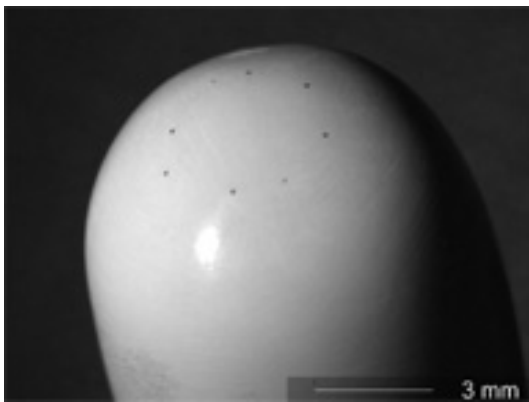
Optical micrograph of an 8-hole array formed on the tip of a fuel injector nozzle shape by incorporating removable metal wires in gelcast ZrO_2 .
